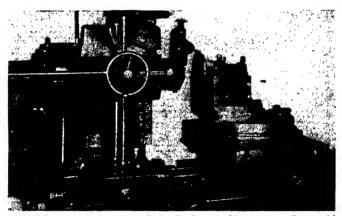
Using a sweep tool on a Lucas boring machine to turn the outside of a flange.
